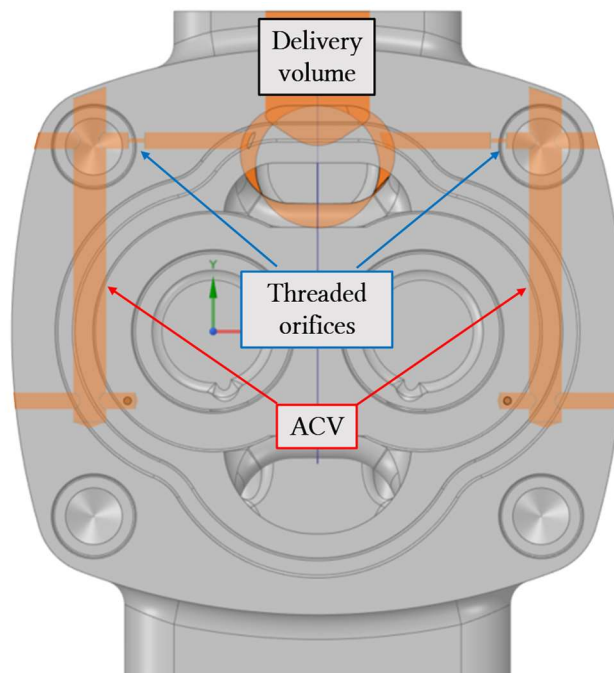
Pump housing views with highlighted ACV surfaces: Front view.
